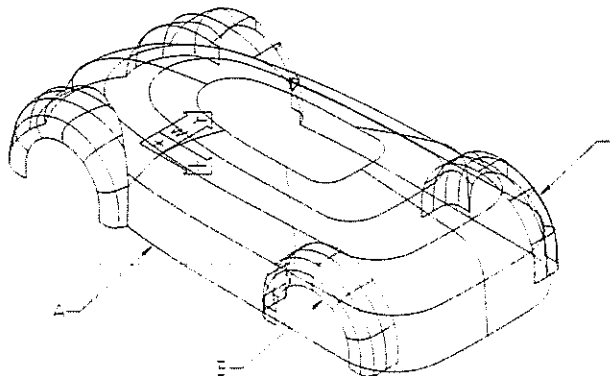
Revolve and extrude surfaces joined together and mirrored
